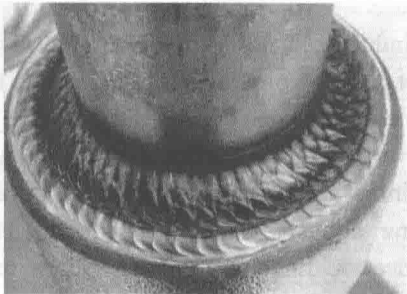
Welding Performed in the Old Times by a Blacksmith
